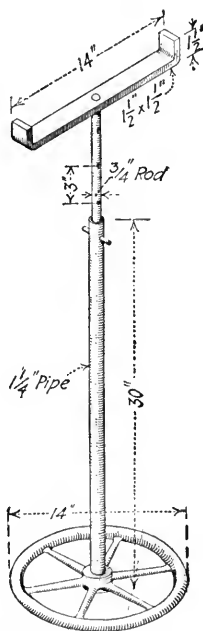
HOMEMADE SHARPENING REST FOR LONG STEEL.
